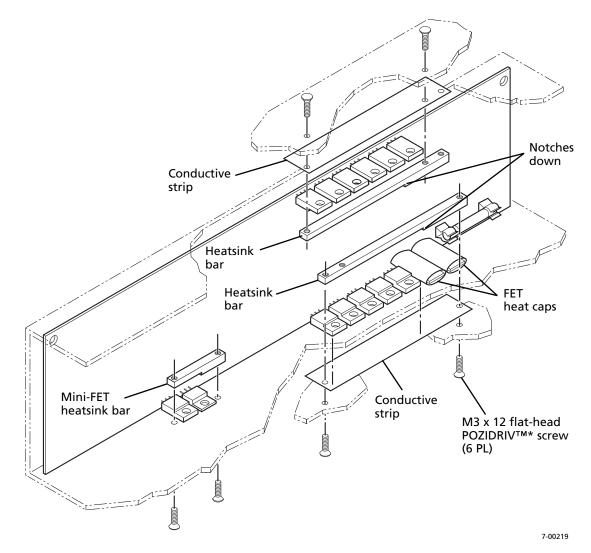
Heatsink bars and conductive strips on BBU PCB
